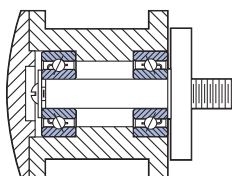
Typical Tape Guide design using screw and washer to solidly preload by clamping inner rings – Outer Ring Rotation
